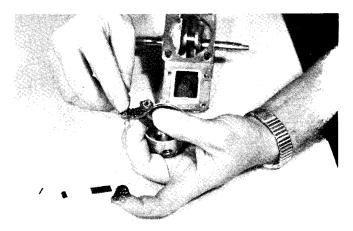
Positioning Needle Bearings in Rod with Grease
